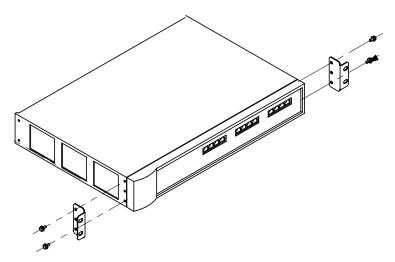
Fixing the side attachment brackets to the Ethernet switch
